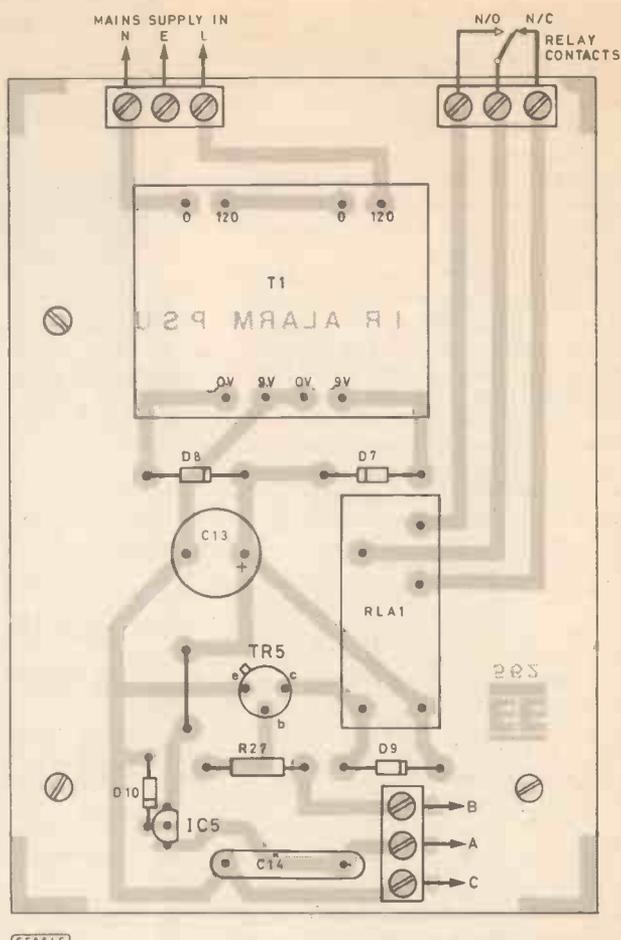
Printed circuit board component layout for the p.s.u. and relay driver.
